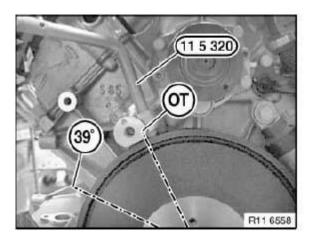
Identifying Special Tool 11 5 320 Courtesy of BMW OF NORTH AMERICA, INC.
